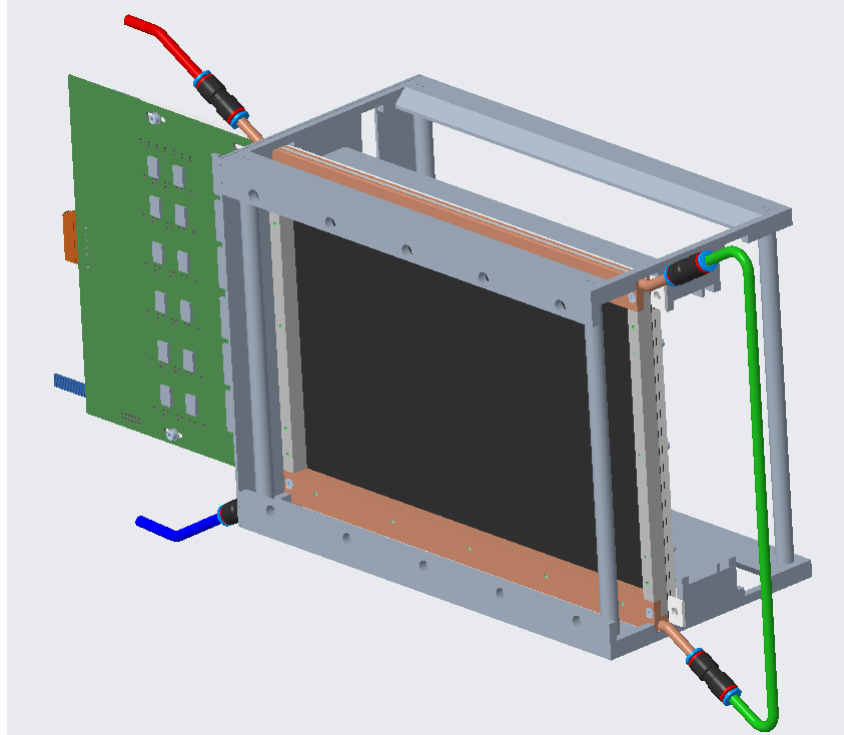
My mechanical support design, with holes for attaching to the calorimeter
